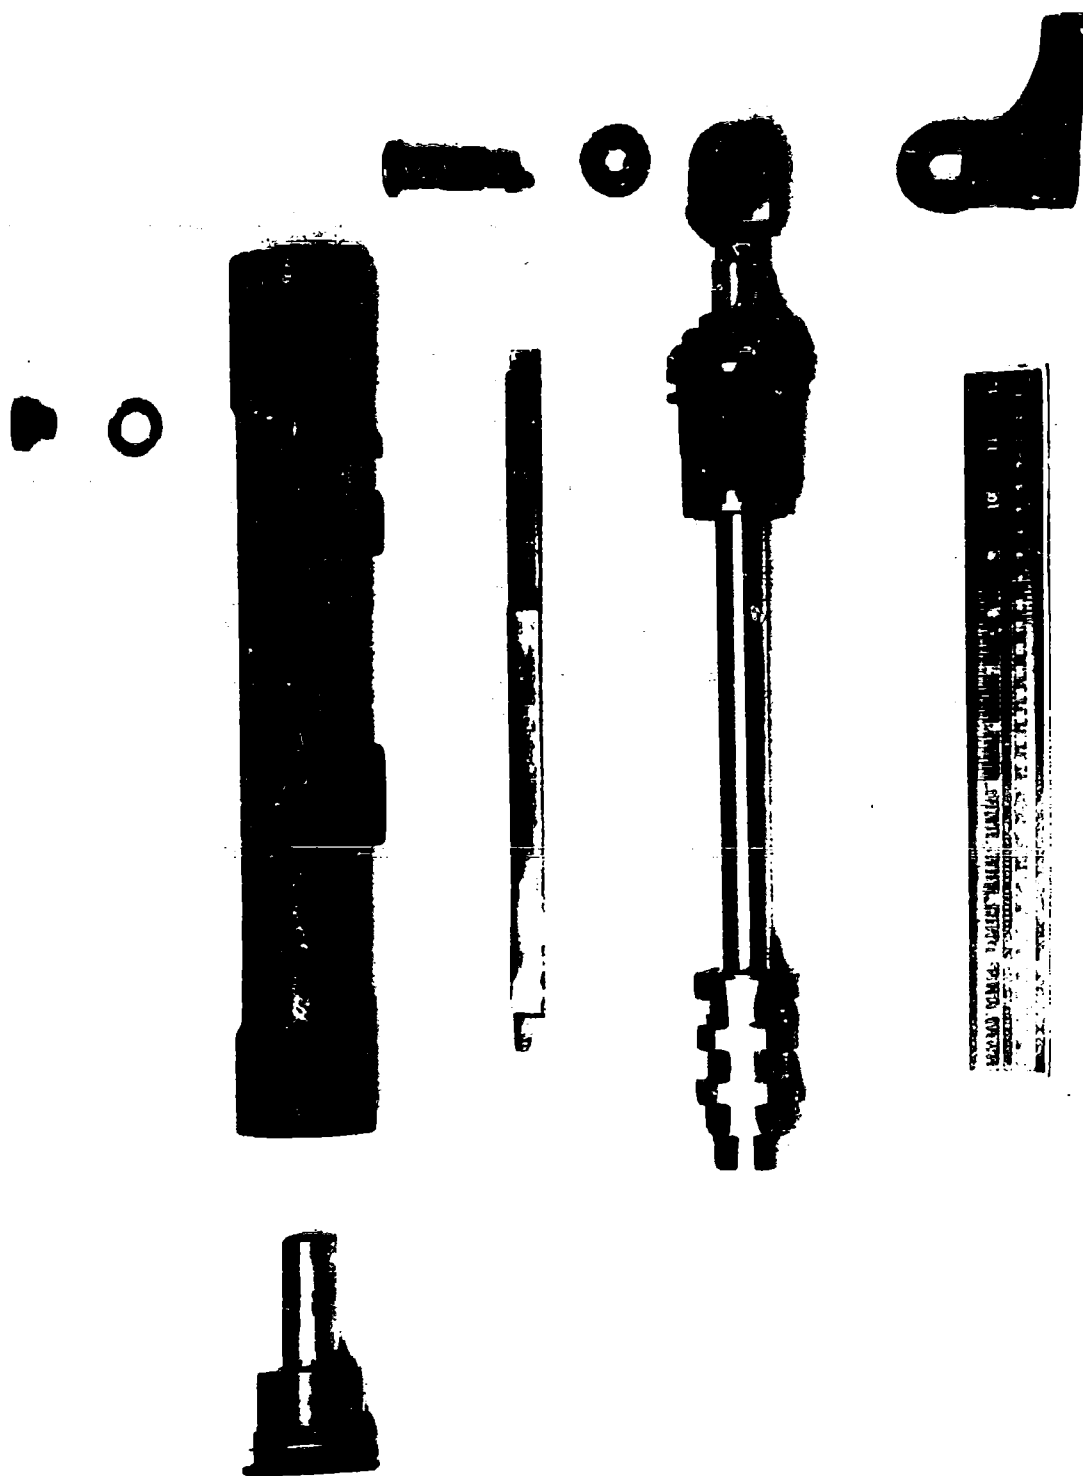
DISASSEMBLED HYDRAULIC RECOIL BRAKE FOR 37MM NS GUN, SLIDE VALVE CLOSED
